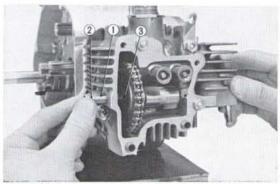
① Center pin ③ Oil guide ② 8.1 × 1.0 O ring
